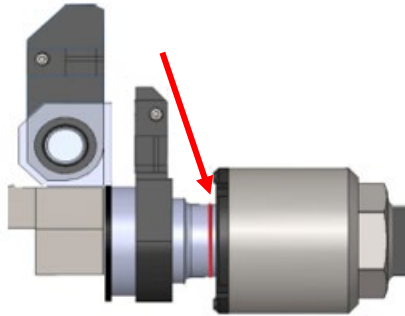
Indicator mark on integrated pressure head highlighted in RED
